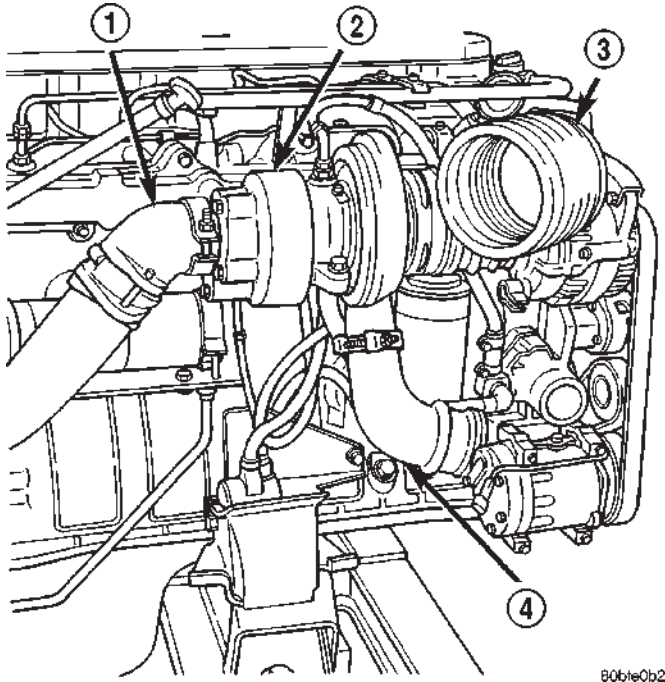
Oil Supply Line and Charge Air Cooler Inlet Duct
